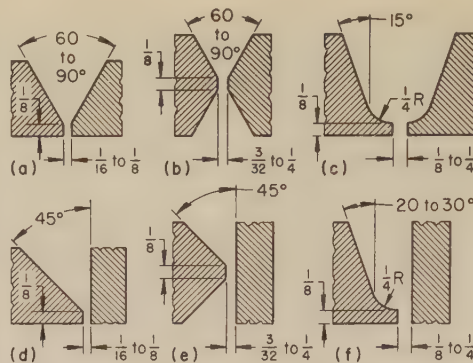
Typical grooves used in gas welding plate  $\frac{3}{16}$  in. or more thick
